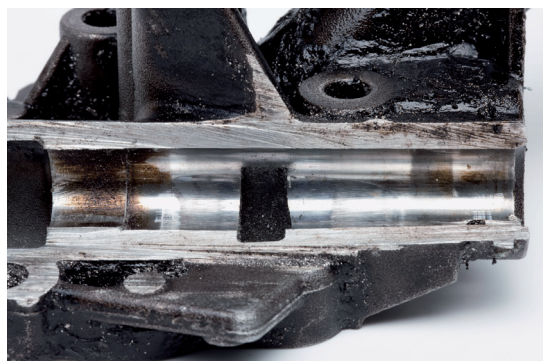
Close-up view of the clogged control valve with clear seizing marks
